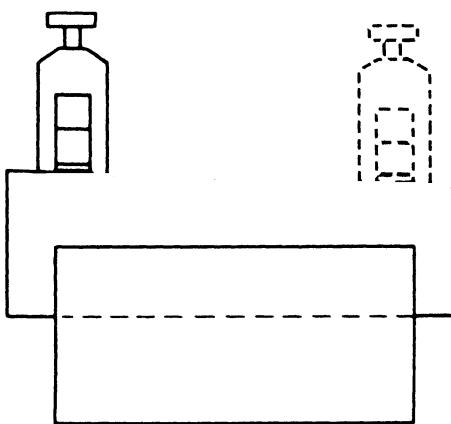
Checking the taper of a piston that is resting in a V-block.
